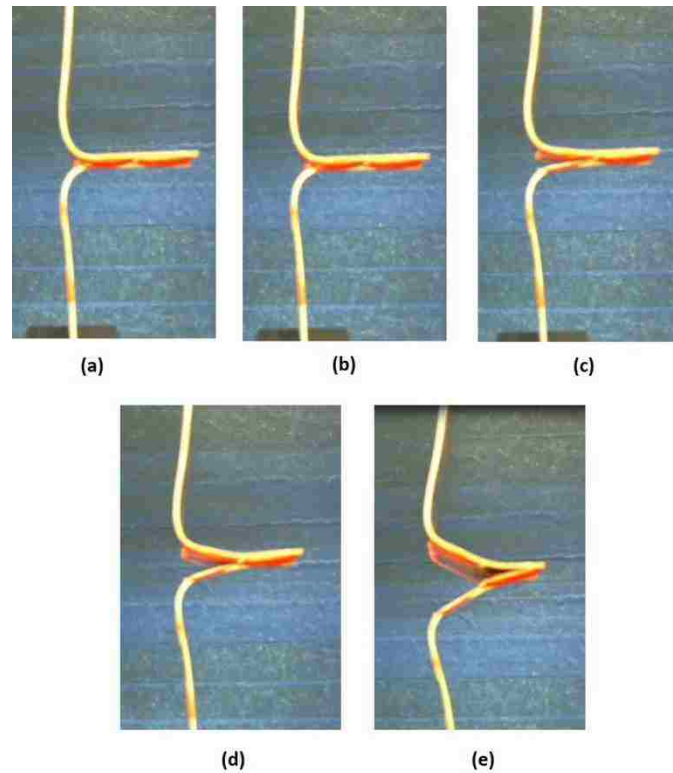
Tensile test of a 1.3 mm thick welded coach joint with DOW adhesive; un-deformed shape (a), shape before the adhesive yielding (b), shape after the adhesive yielding and before nugget yielding (b), shape at nugget yielding (d) and during crack propagation, before final failure (e).
